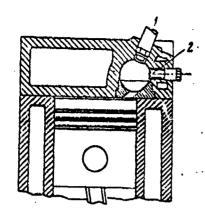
Cylinder head of modified CFR test engine. 1) Fuel nozzle; 2) scaler disk.
